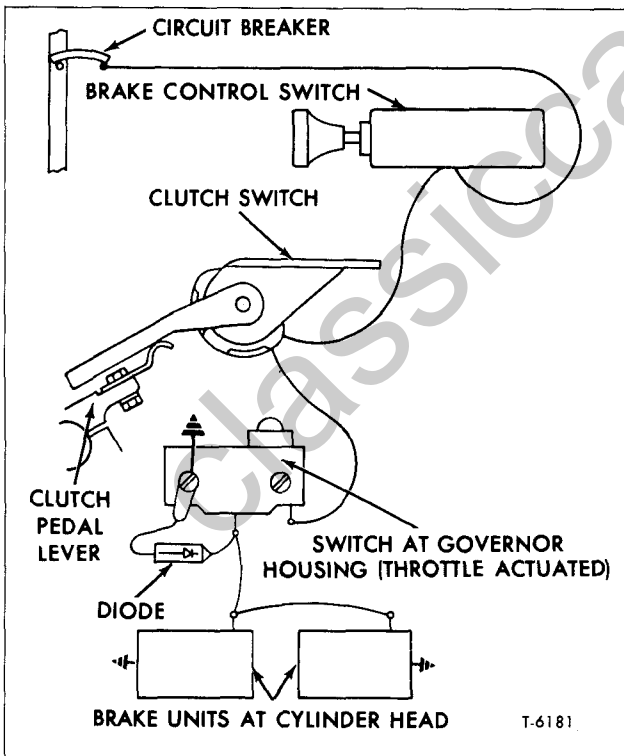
Schematic Arrangement of Engine Brake Electrical Wiring
